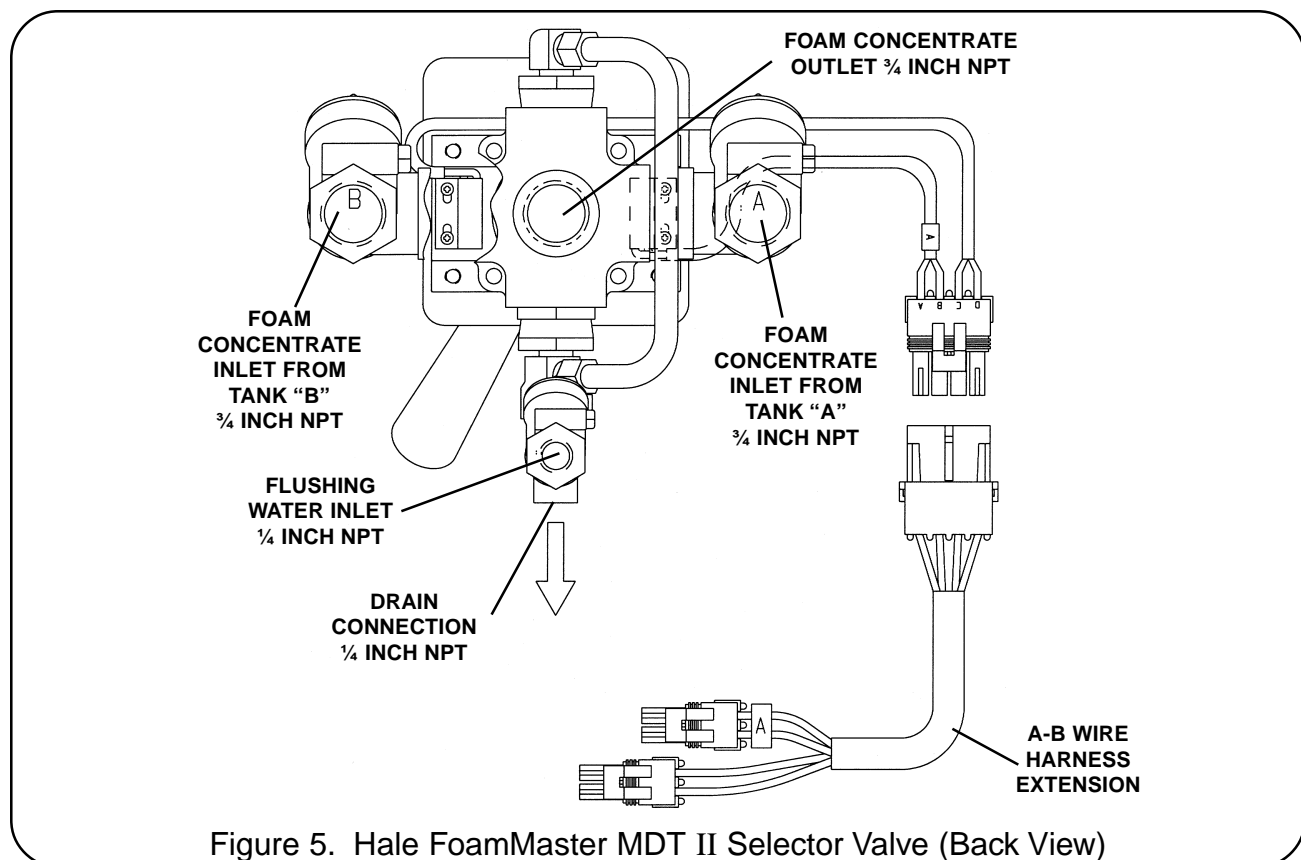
Hale FoamMaster MDT II Selector Valve (Back View)
